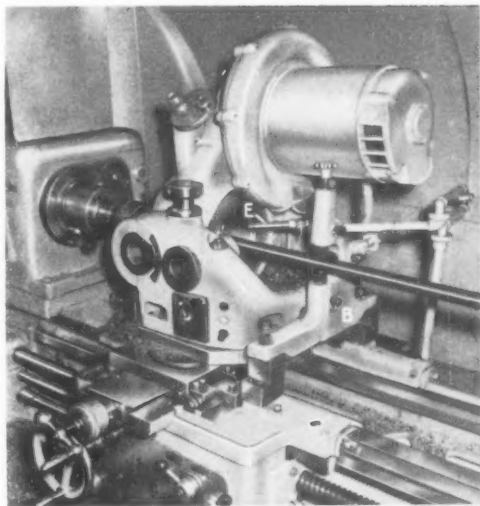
The Burgsmuller Thread Whirling Attachment Viewed from the Tailstock End of the Lathe
